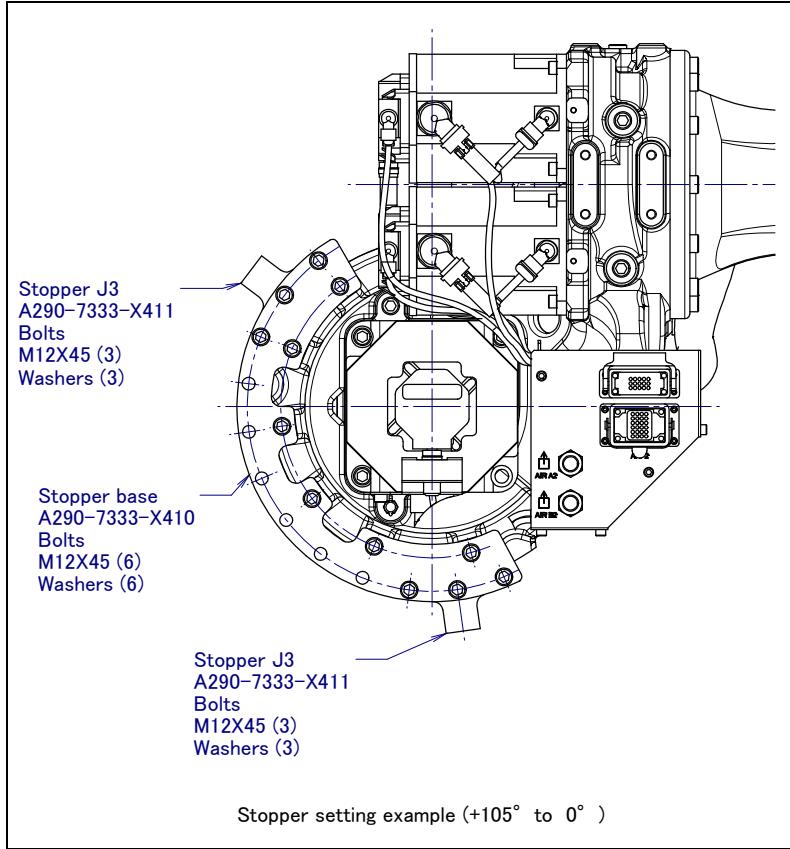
(r) Mounting the J3-axis adjustable mechanical stopper (2/3)
